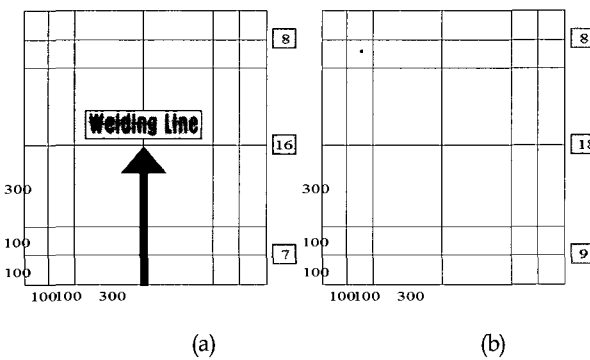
Transverse shrinkage of experimental model, in mm. (a) front side 1 layer-welded specimen, (b) back side 1 & 2 layer-welded specimen.
